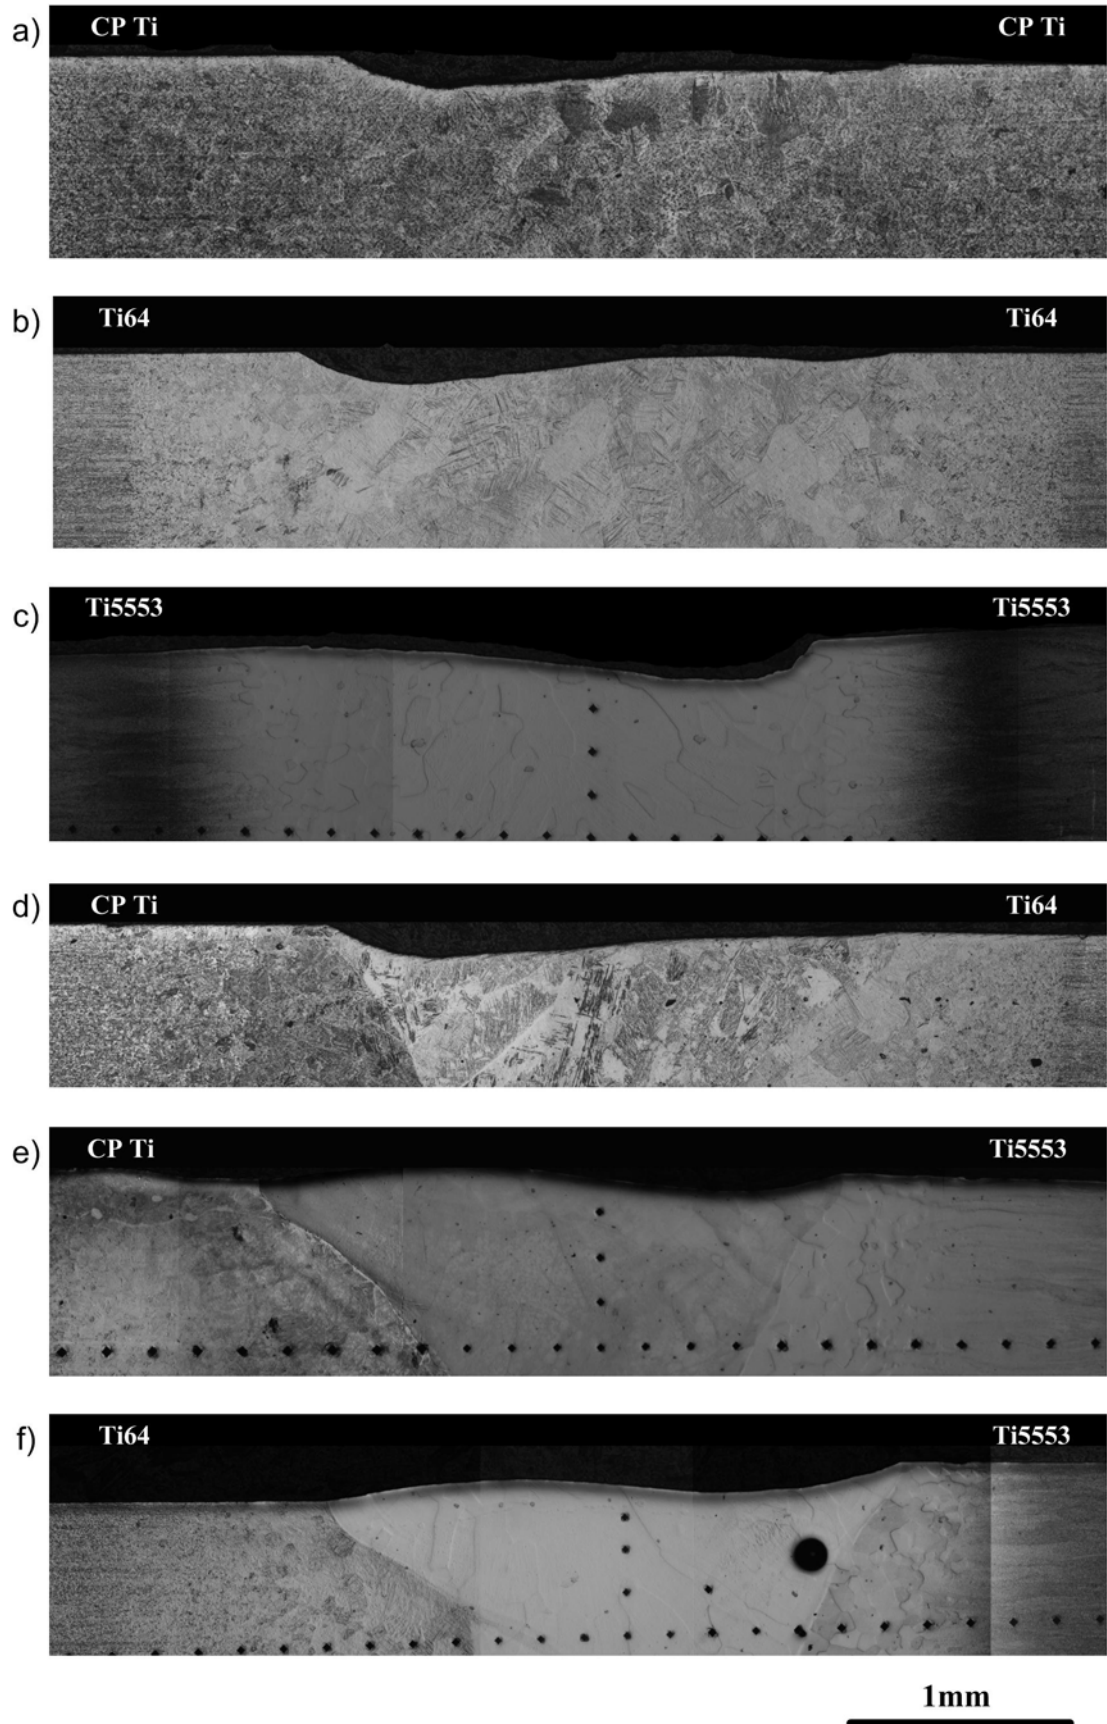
Composite images showing the top of the weld transverse cross sections for all weld combinations.
